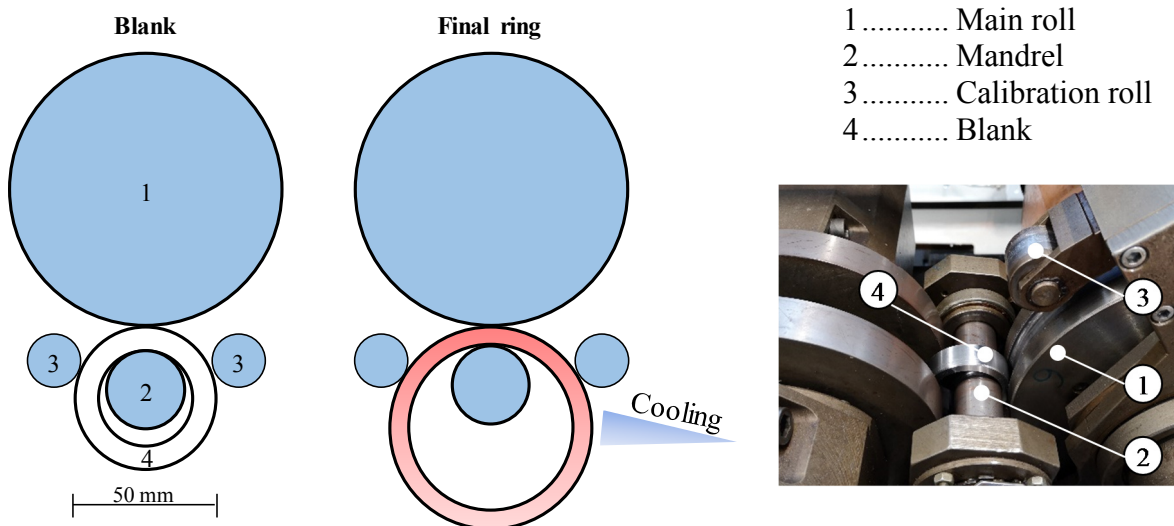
Principle test setup (left) and experimental ring rolling machine (right)
